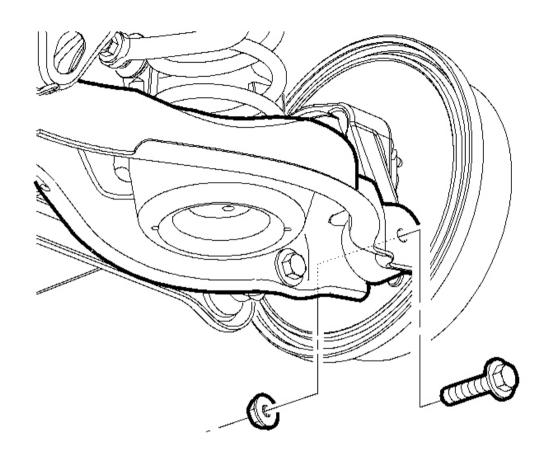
Lower Control Arm, Knuckle Bolt & Nut Courtesy of GENERAL MOTORS CORP.
